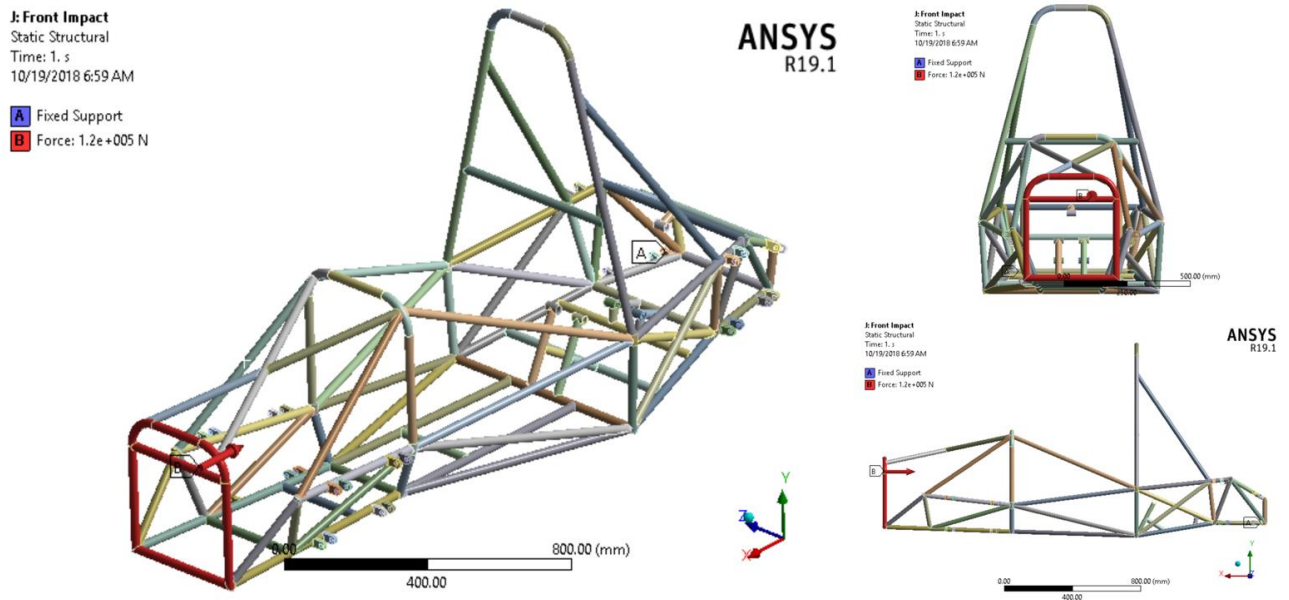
Front impact load applied on the Formula SAE M1 Chassis (front, side, and isometric view)
